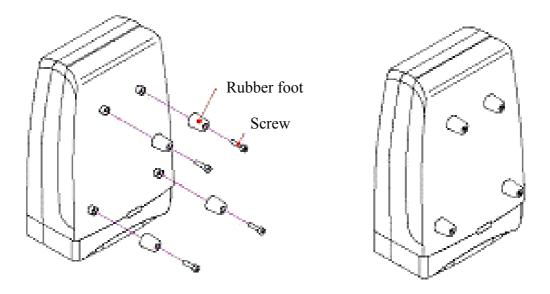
IDR horizontal desk mounting using supplied rubber pads and tapping screws
